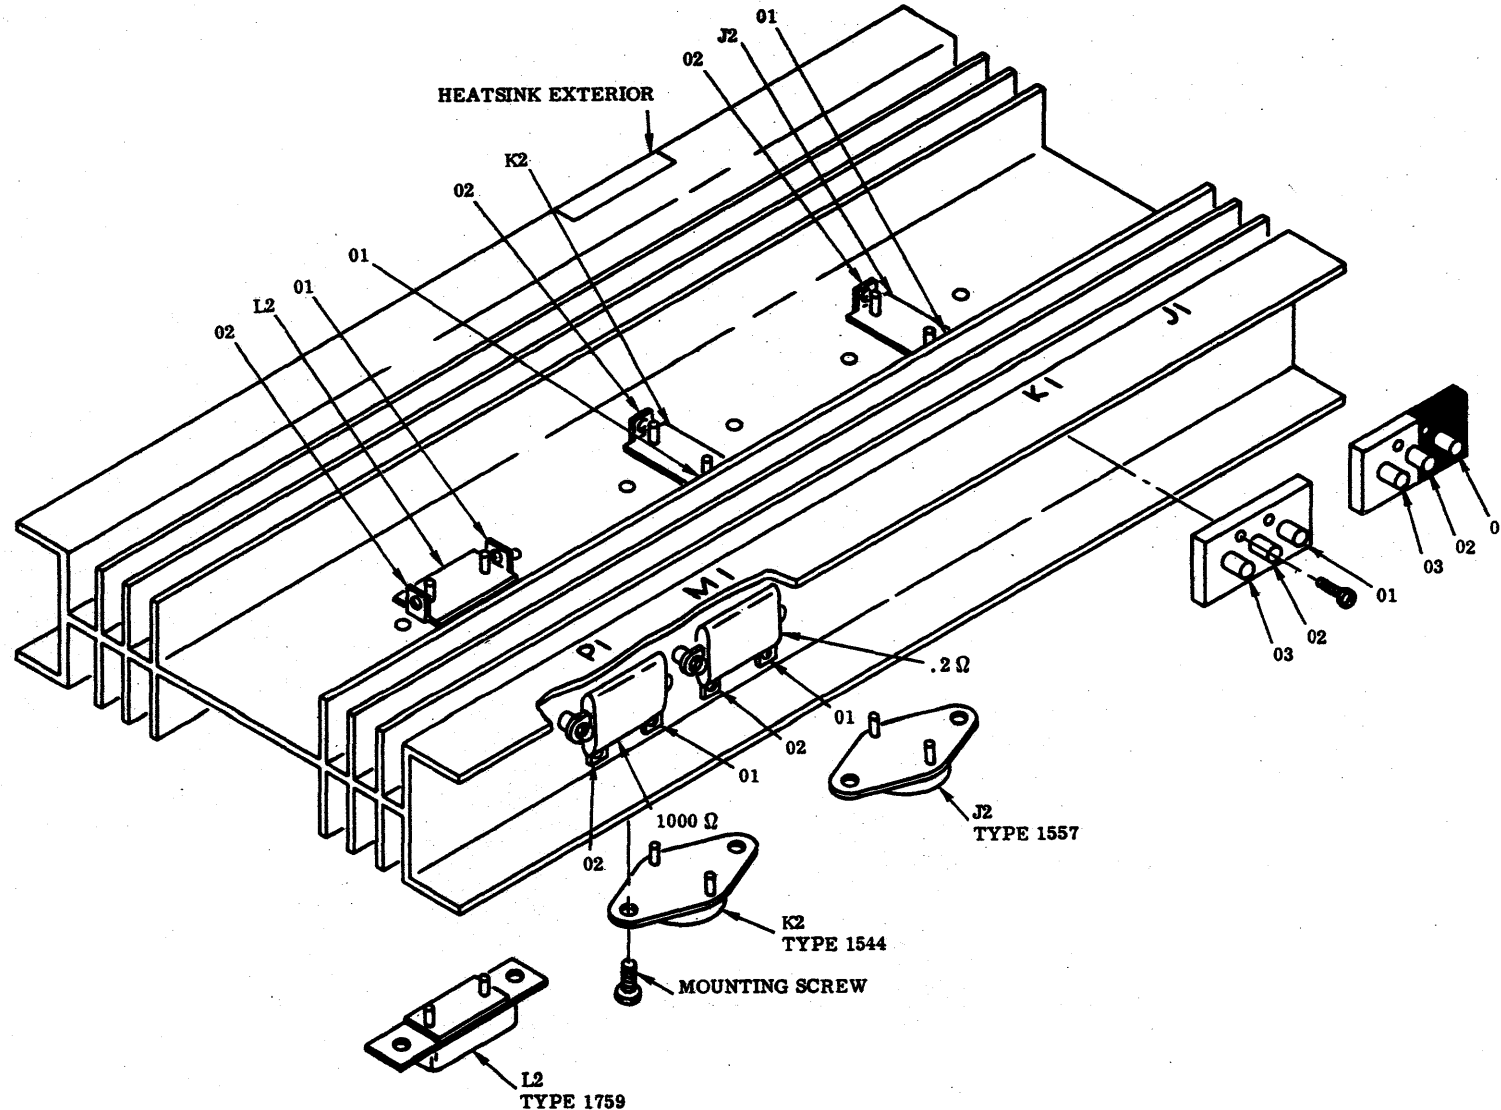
HEATSINK ASSEMBLY #11896271 (TYPE 1)
